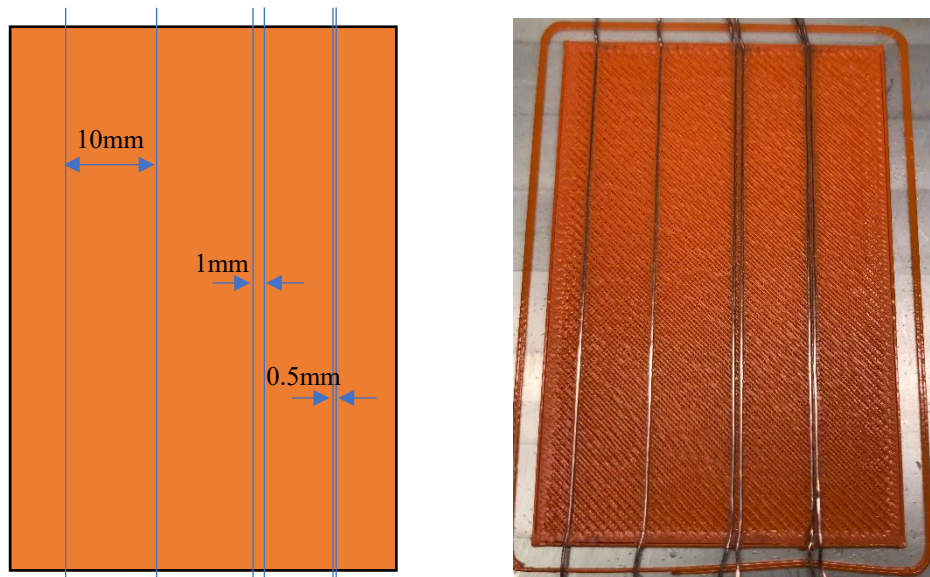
Schematic (left) of printed part (right) containing parallel 26AWG wire traces
